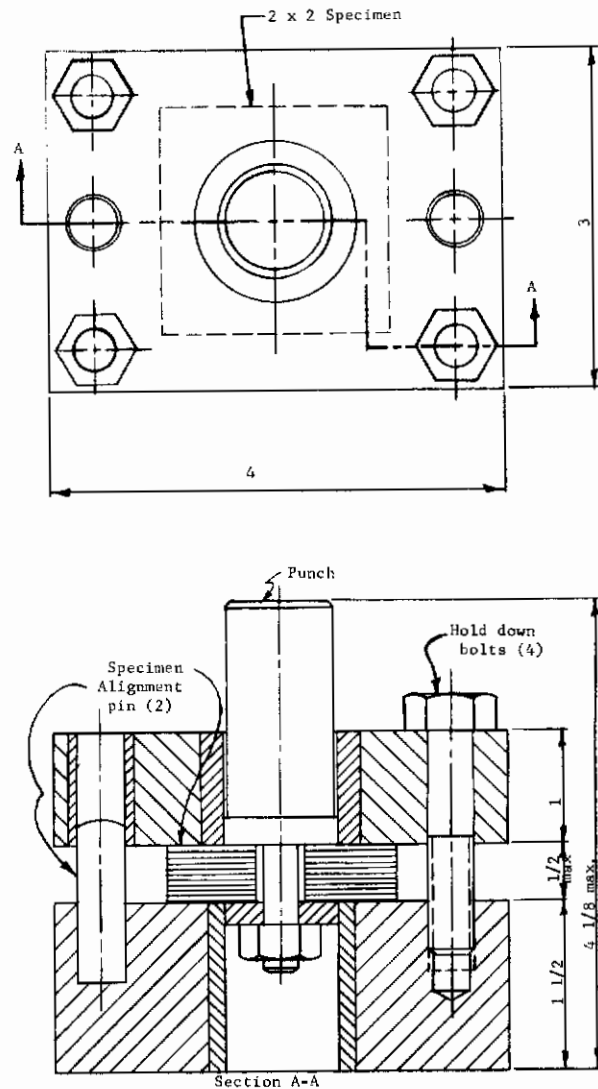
TYPICAL PUNCH SHEAR TOOL
